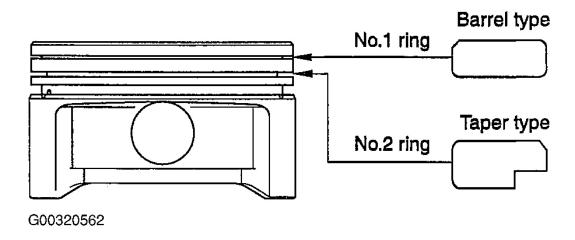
Installing Piston Rings Courtesy of KIA MOTORS AMERICA, INC.
